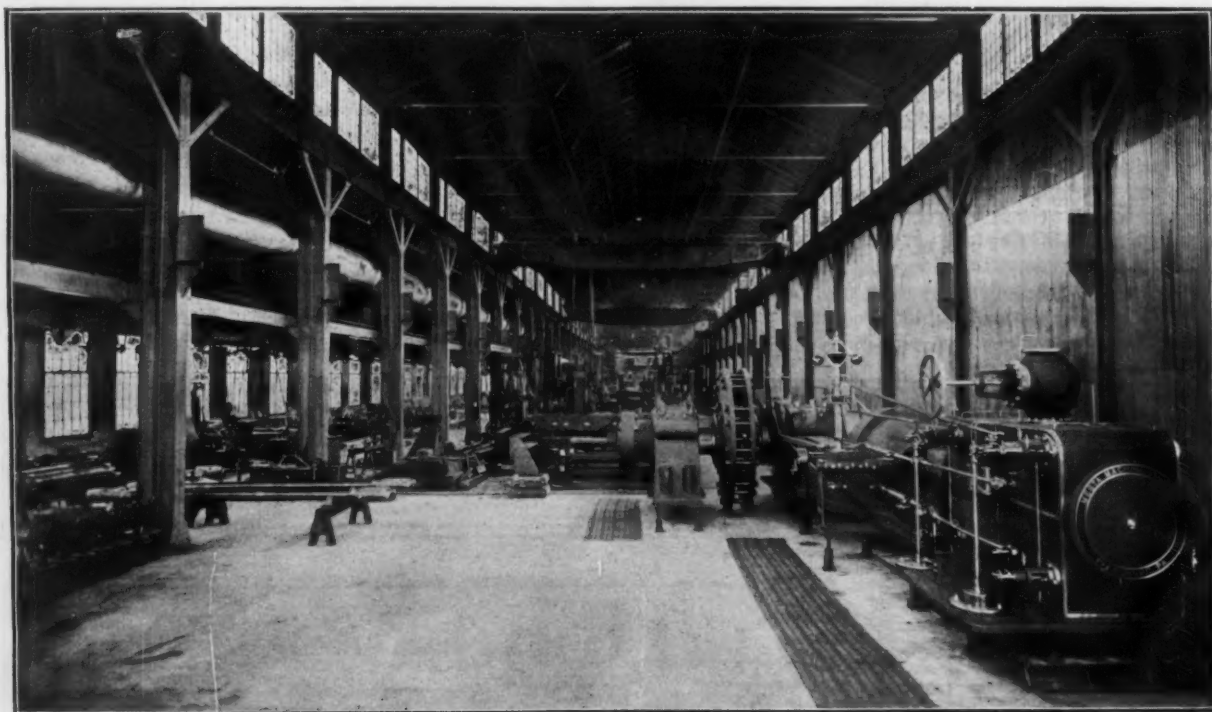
View in the Machine Shop of the Mesta Machine Company's Plant at West Homestead, Pa. An Erecting Floor in the Foreground.
